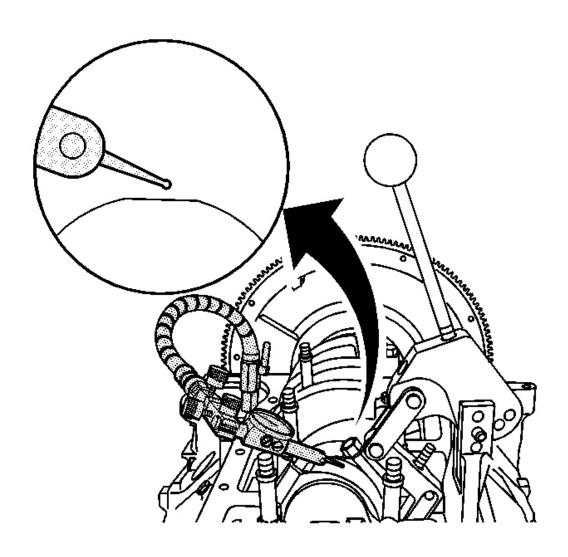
Proper Indicator Positioning Courtesy of GENERAL MOTORS CORP.
